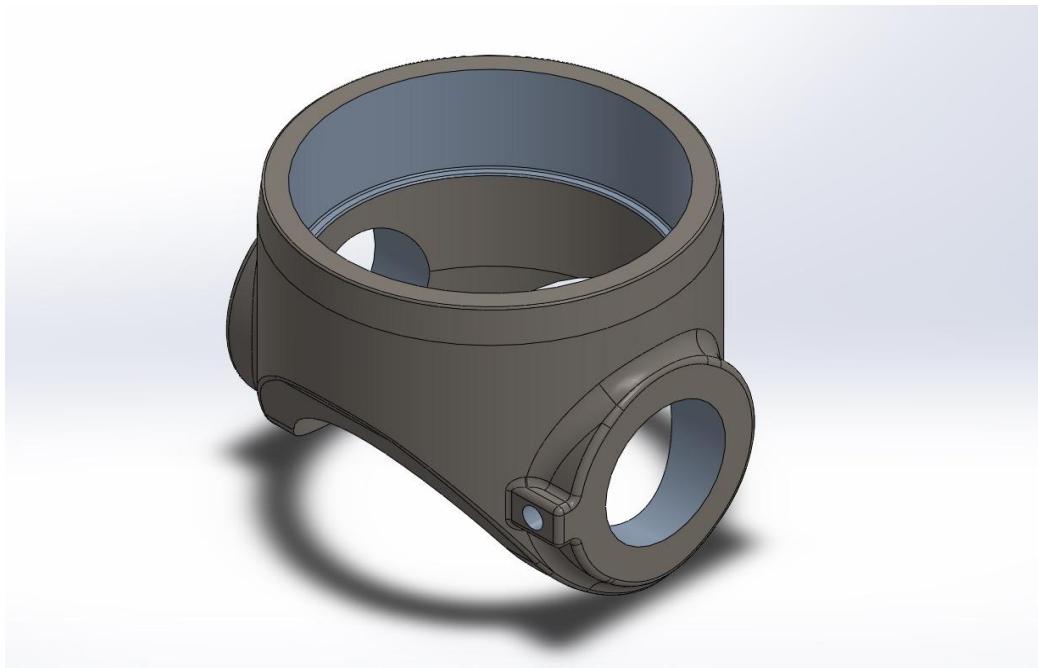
Redesigned “base eye” 3D model created in SolidWorks
